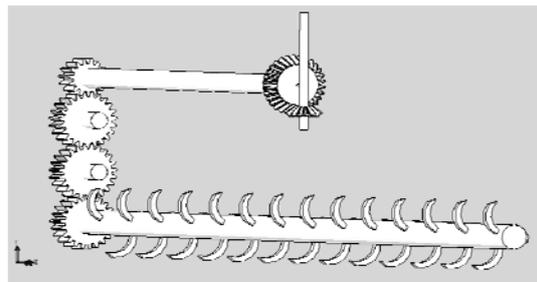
Virtual Assembly Drawing of the Drivetrain of Reversal Stubble-breaking rototiller
